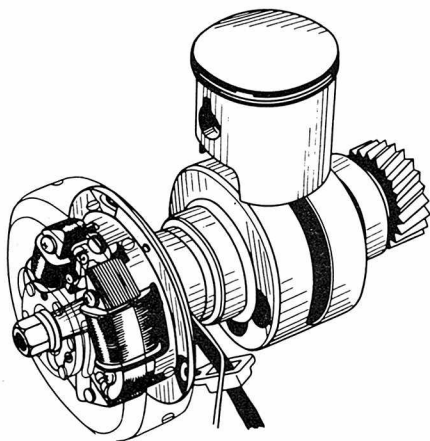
View of crankshaft magneto used on 90cc Suzuki.
